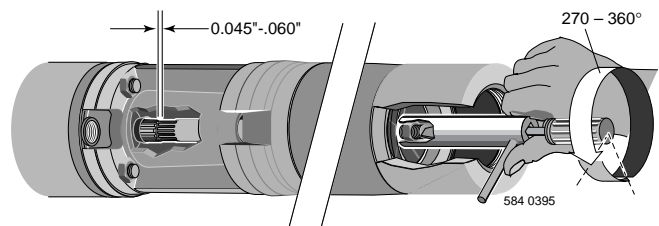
Hold thrust screw and tighten locknut. Thrust screw setting must not change when tightening locknut.
